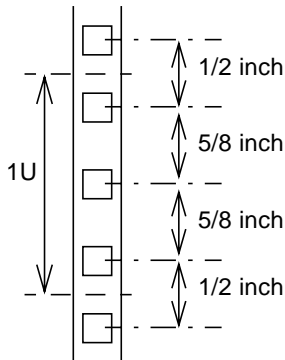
EIA/RETMA Mounting Hole Pattern Dimensions
